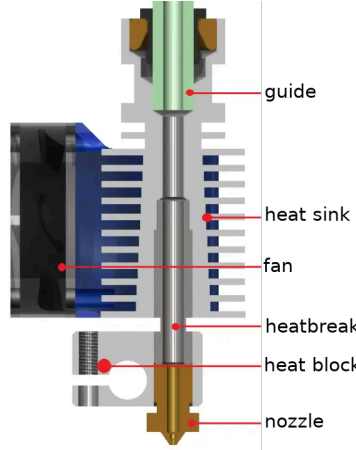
E3D-V6 extruder with main elements: cross-section of the extruder with the main parts [modified from (E3D-online, 2021)].
